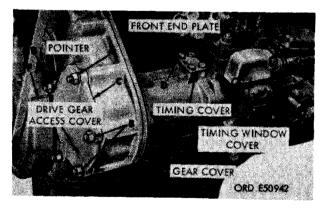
REMOVING OR INSTALLING INJECTION PUMP ACCESS COVERS .
